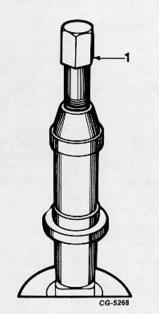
Bushing Remover SE-1955-5 Installed in Lower Bushing 1. Remover
